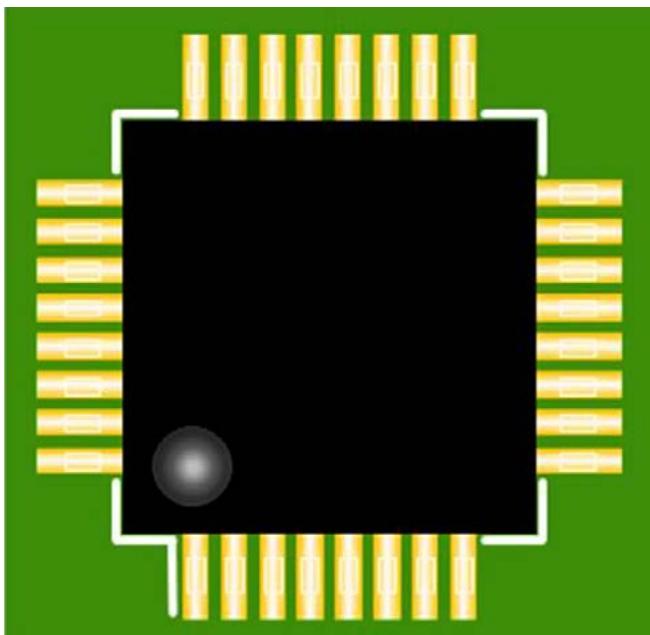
Silkscreen polarity marking, reference designators, revision level and serial numbers should be visible after assembly.
